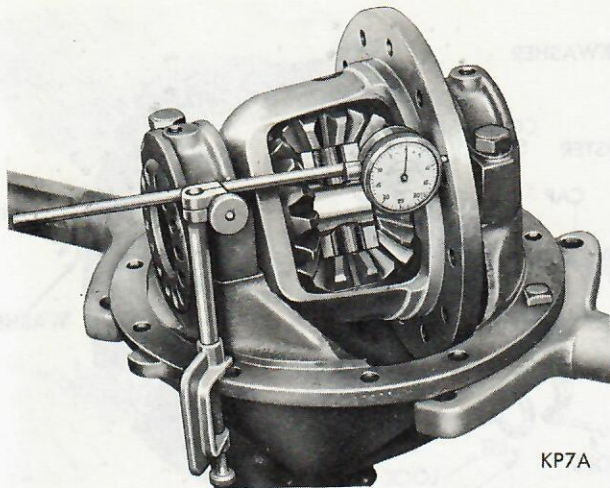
Checking Drive Gear Mounting Flange Runout case as follows: Install differential case and respective bearing cups in carrier.
